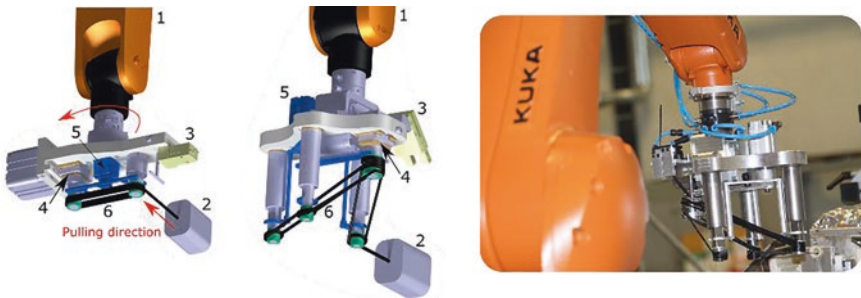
Winding tools for the simple loop structure and for the 3D component (left): (1) 6-axis robot; (2) Impregnation die; (3) Fiber gripper; (4) Pre-tensioning mechanism; (5) Ejector; (6) Wound fiber skeleton. PP/GF skeleton winding process in progress (right)
